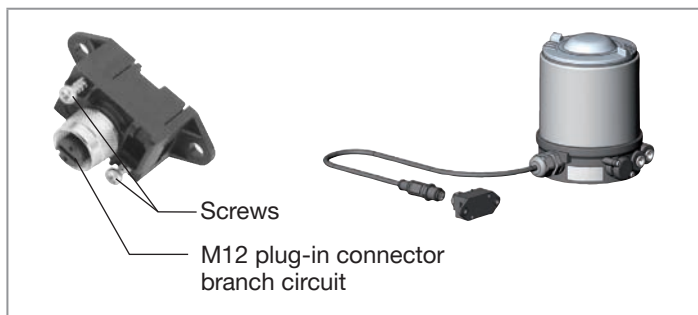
Control head 8691 with multi-pole cable and flat cable terminal
